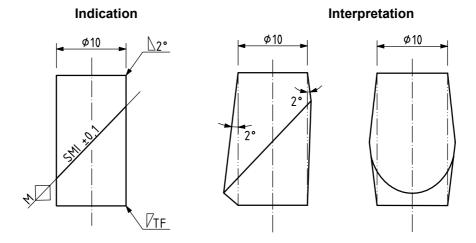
Inclined parting surface on a part with a specification of taper to fit (TF)
